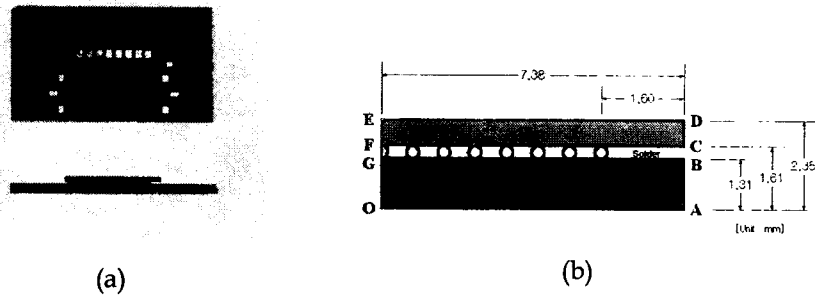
(a) Flip-chip specimen and (b) specimen dimension
